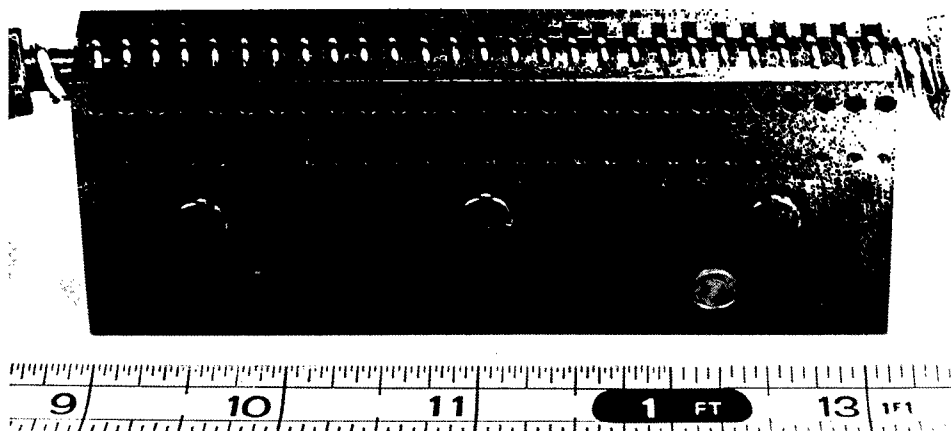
A section of helix in the brazing fixture for ceramic brazing
